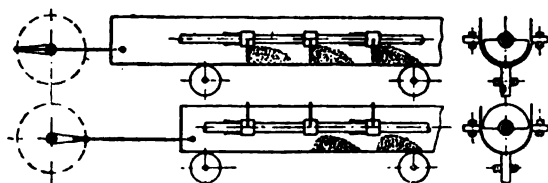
Push-plate Conveyor on the Commichau Principle.
